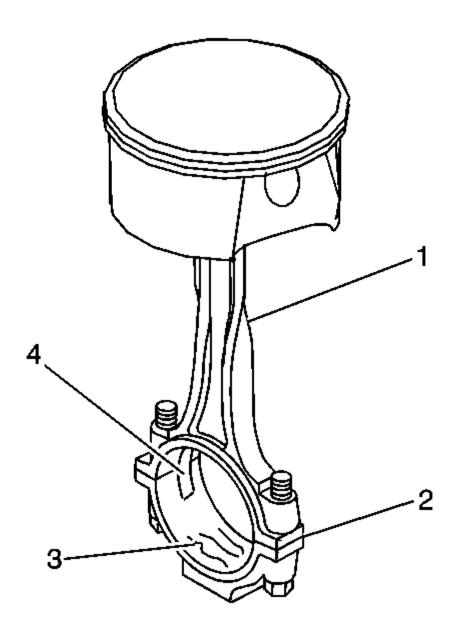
Identifying Connecting Rod Inspection Areas Courtesy of GENERAL MOTORS CORP.
